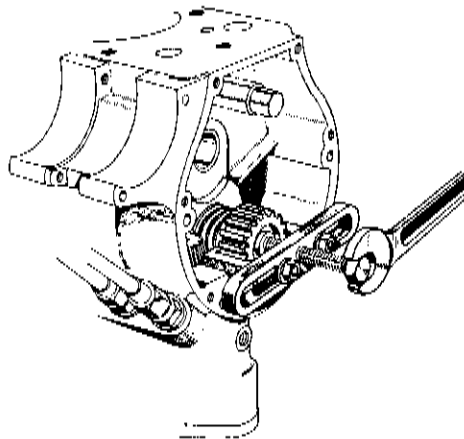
Engine shaft pinion extractor. (Service Tool 61-3256.)
